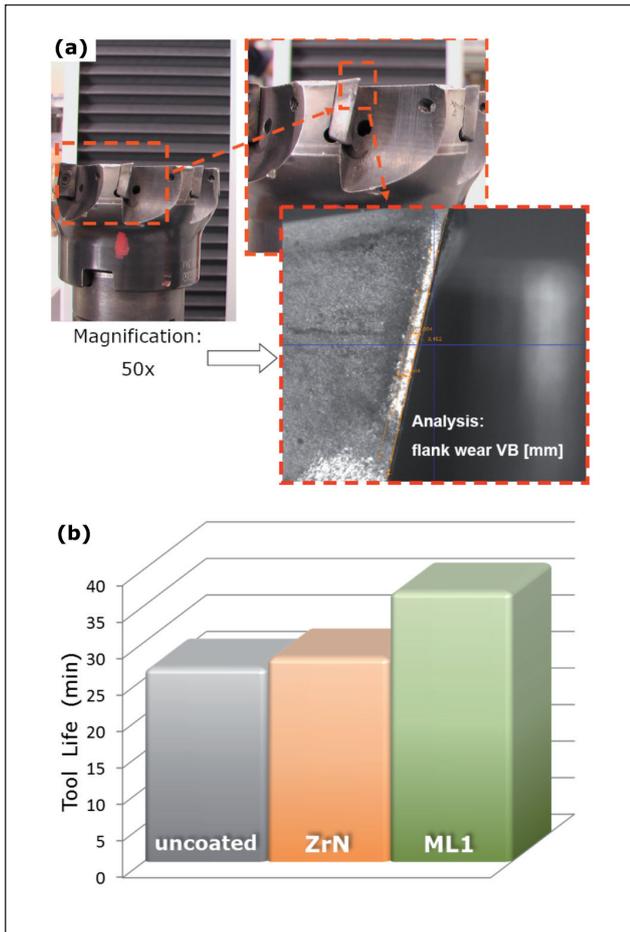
(a) Detail of an insert mounted on a milling tool and magnification of the flank wear. (b) Comparison of tool life of uncoated inserts and inserts coated with a single ZrN coating and with a ZrN/TiN superlattice coating (ML1)
